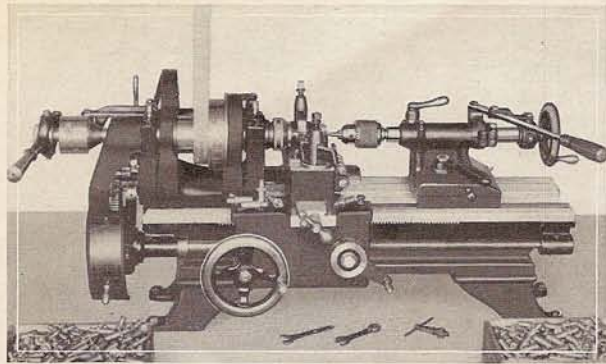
No. 22-9-inch Junior Lathe Equipped with Lever Draw-in Chuck, Hand Lever Tail Stock and Double Tool Rest
